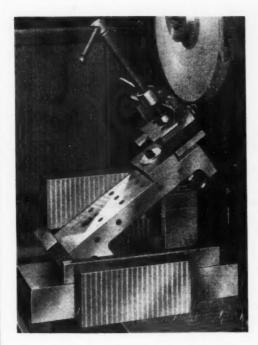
Example of involved set-up with magnetic parallels. Note tiny work piece held at the exact angle for grinding on the wheel directly above it. There are no welded sections in this set-up. C-clamp and jig plate are stock items.
